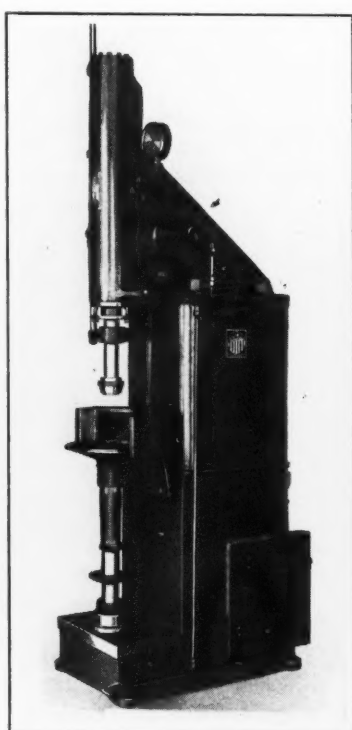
Press for Performing the Same Assembling Operation on Work of Larger Size
